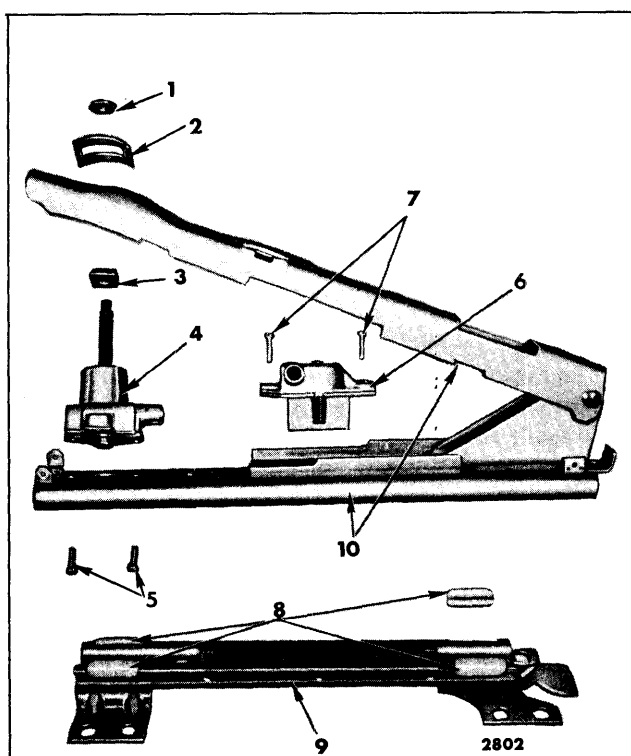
Four-Way Seat Adjuster Components - Buick "B, C & E" Styles
